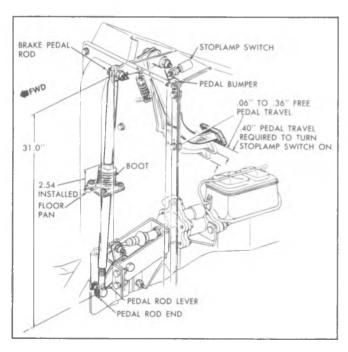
Brake Pedal and Stop Lamp Adjustment P30(32) Model
